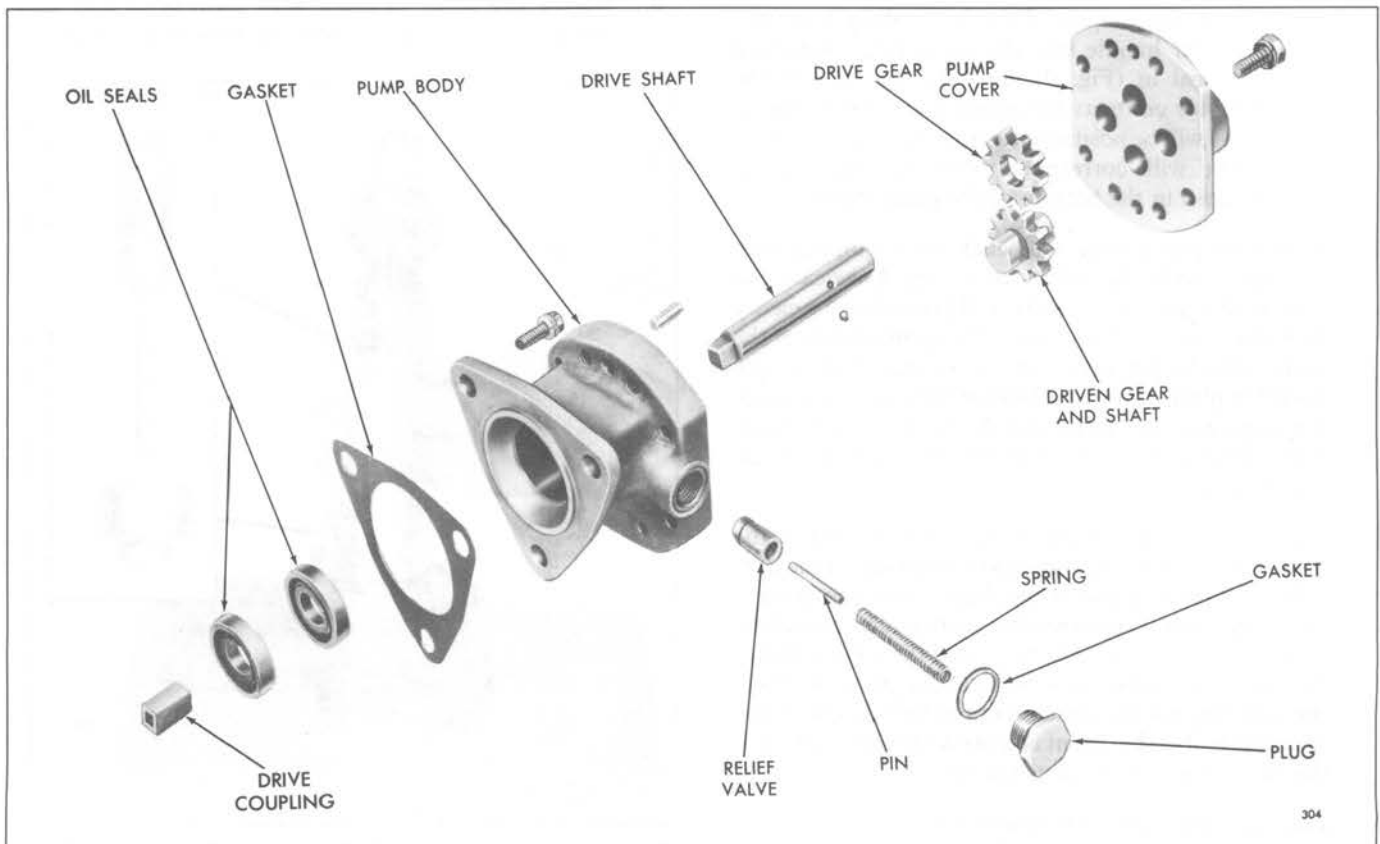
Fuel Pump Details and Relative Location of Parts
